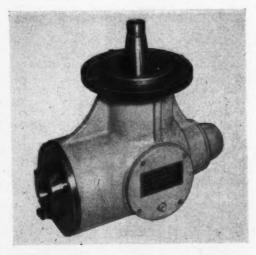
Right-angle attachment for the Futurmill planer/miller conversion unit
